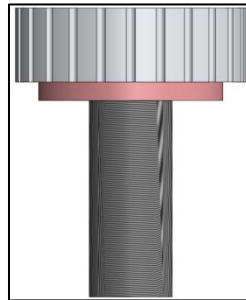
LOCKING BOLT FOR CONNECTION TO AIMING GUIDE
